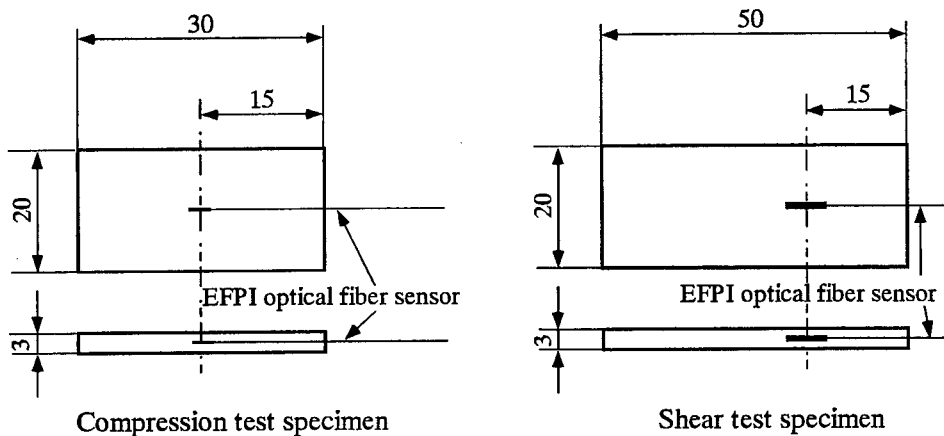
Shape and dimensions of the compression and the shear test specimen.
